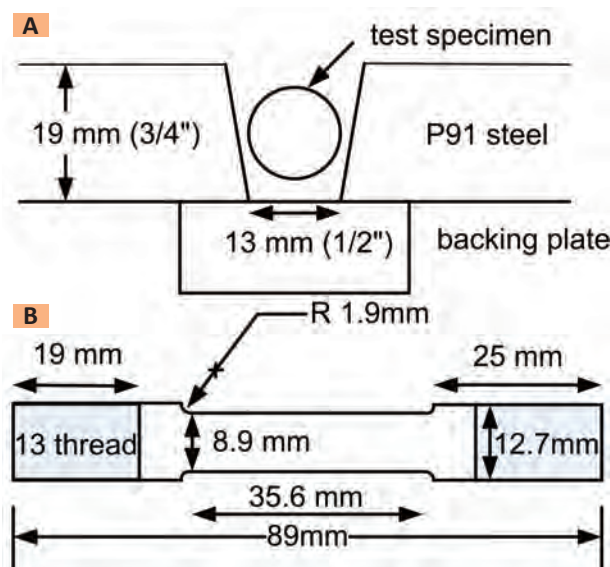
Designs for welding and creep-rupture testing. A — Joint design for butt-joint welding; B — creep-rupture test specimen.
